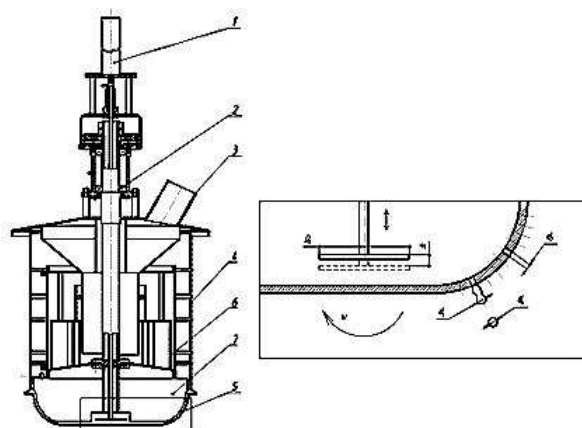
Rotational vibopriller: 1 – oscillator; 2 – bearing; 3 – inlet nozzle for melt; 4 – cylindrical casing; 5 – perforated bottom (basket); 6 – distributor; 7 – vanes
